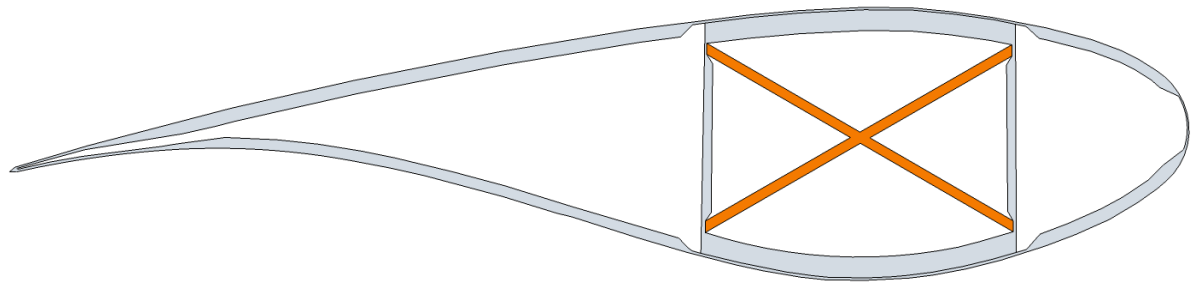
A sketch showing principle preliminary idea for a reinforcing retrofit concept shaped as a cross, which will reduce the cross sectional shear distortion.
